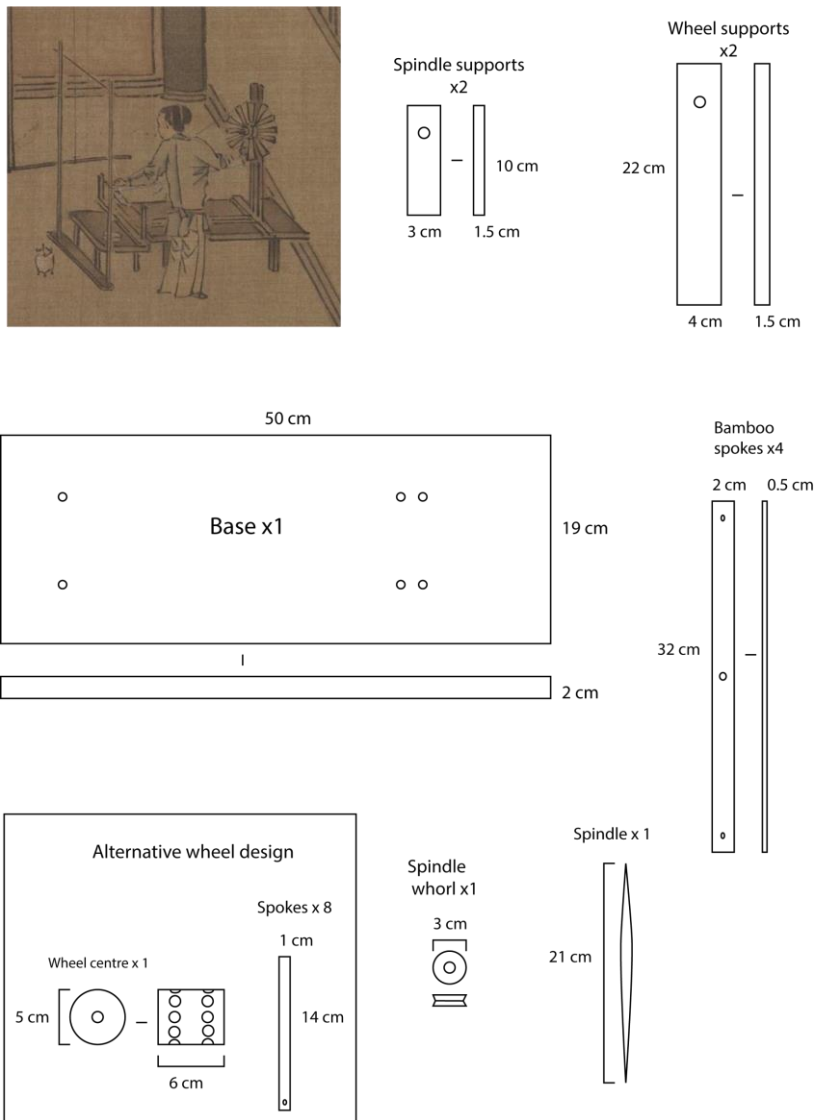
Measured plan for spindle-wheel with 2 potential styles of wheel construction (source: the author)
